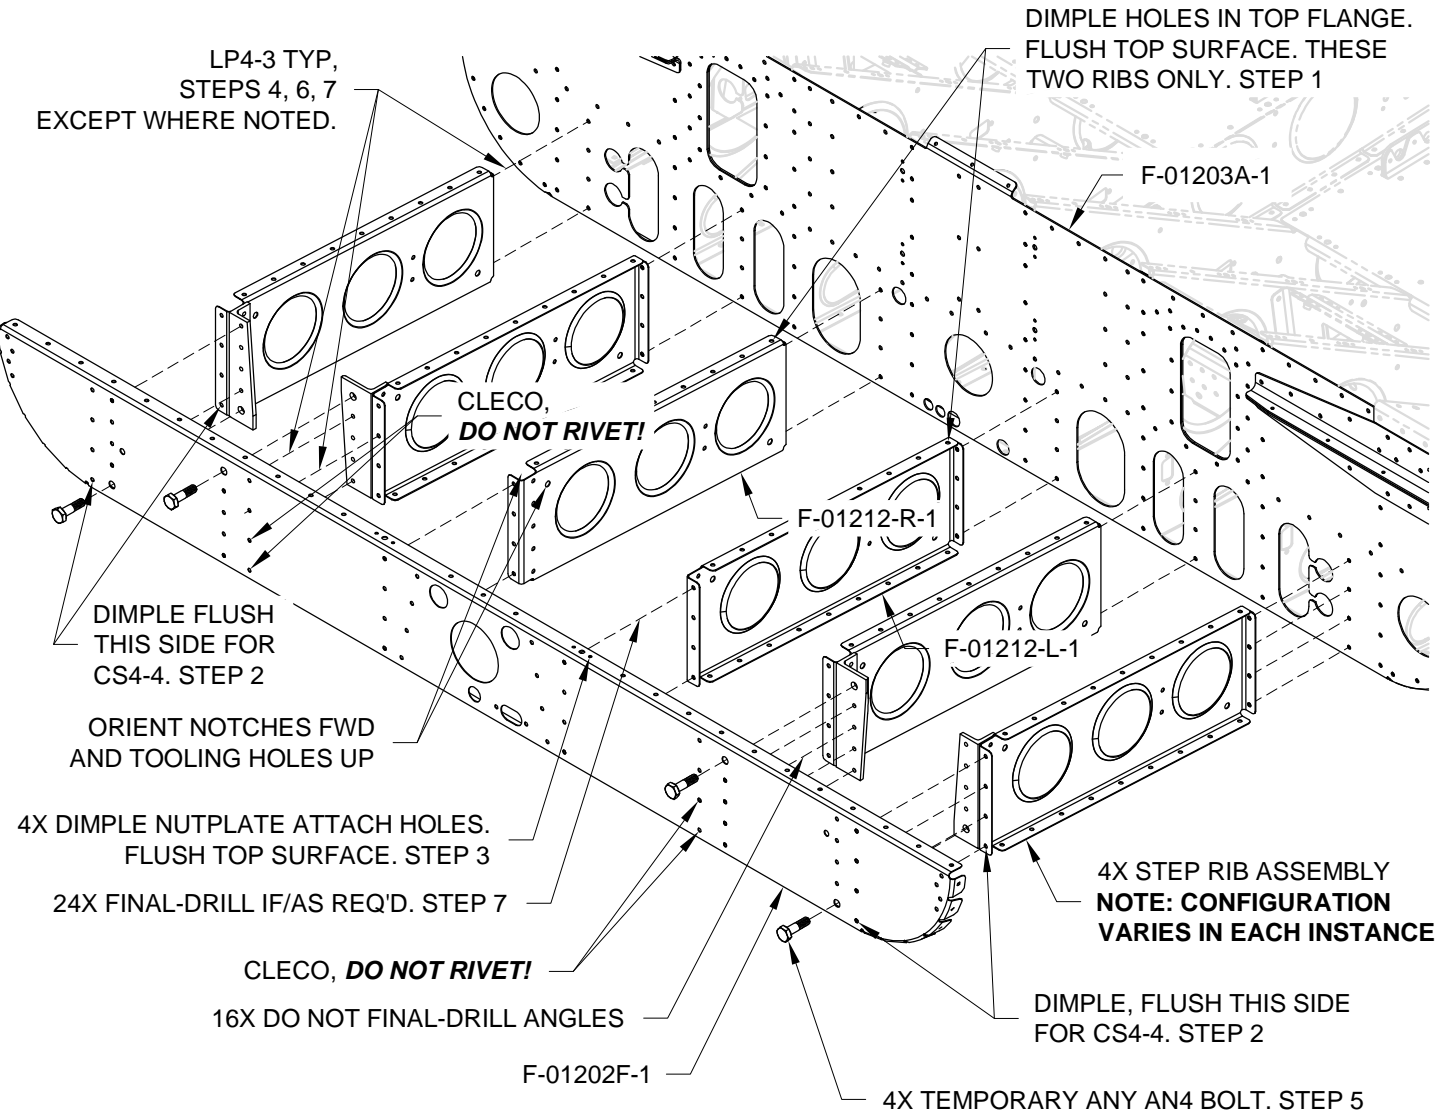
RIVETING STEP RIBS AND F-01202F-1
